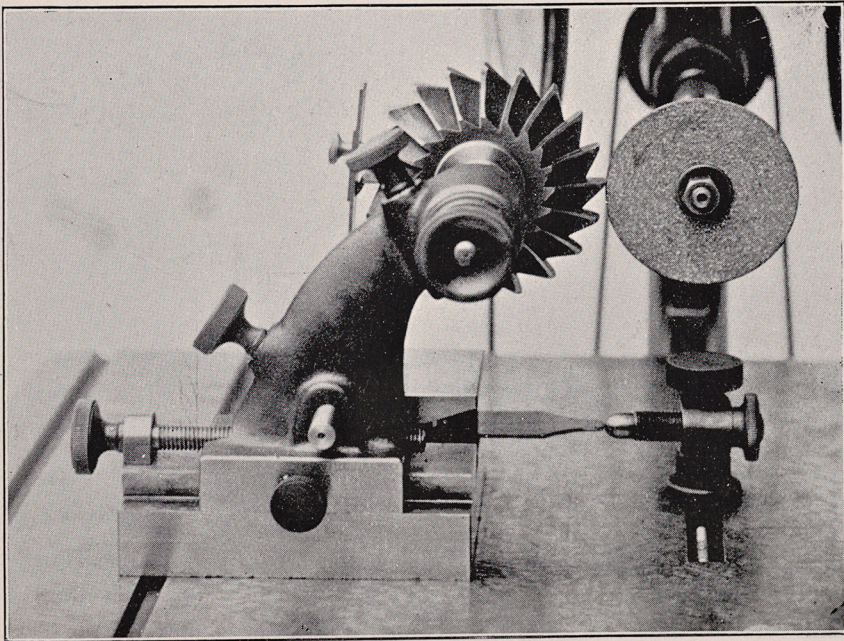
Grinding a Gear Cutter same as in Fig. 11.
